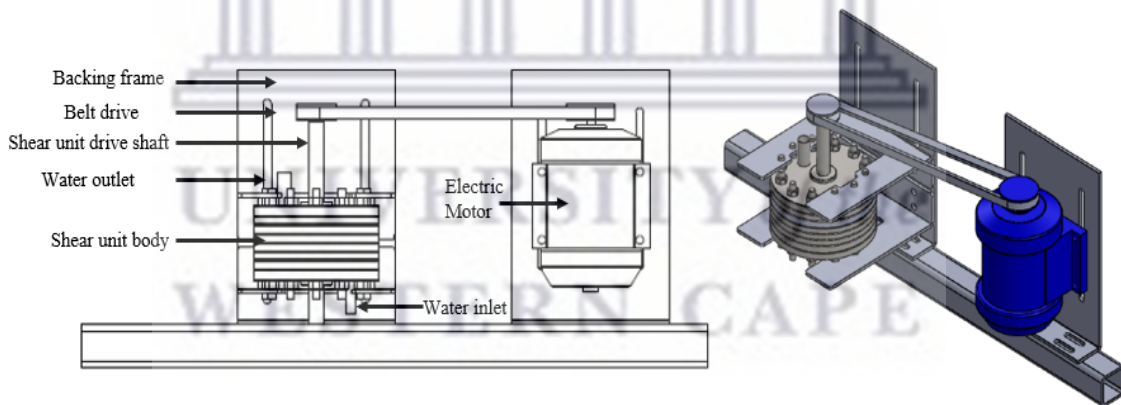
Driving belt connected to shear unit assembly via an electric motor [208].
